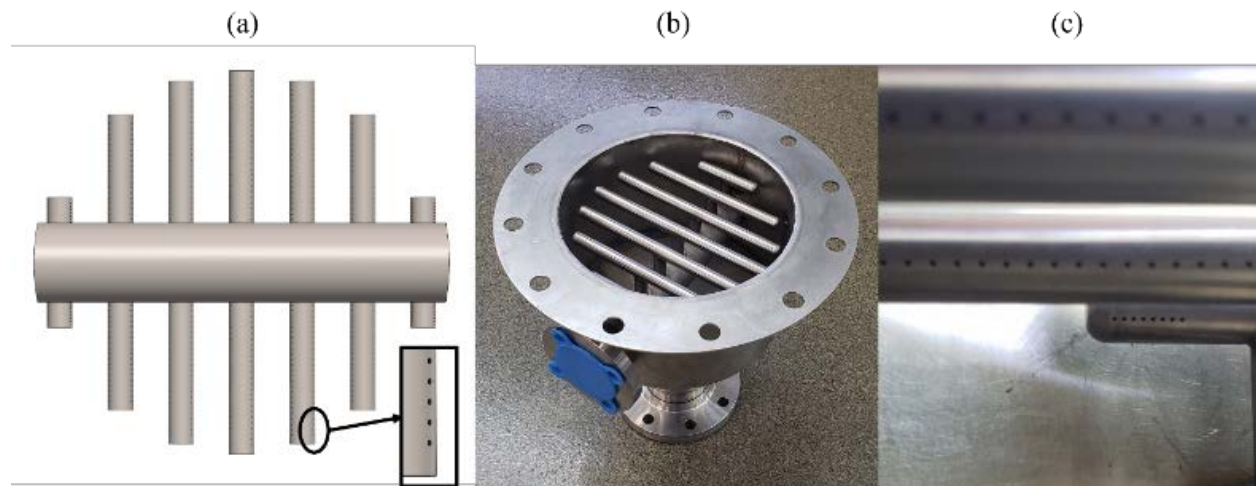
(a) Drawing of the air distributor with a bottom view. (b) Fabricated air distributor assembled with particle collector. (c) Bottom side of the fabricated air distributor showing the air grid holes. The air holes face downward to avoid particle clogging. The air distributor was designed to provide evenly distributed aeration for stable fluidization.
